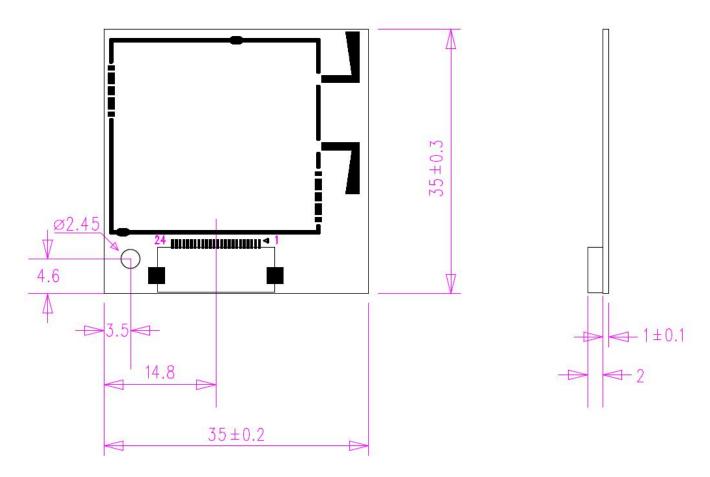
Mechanical Drawing of SY5-A24 Module
